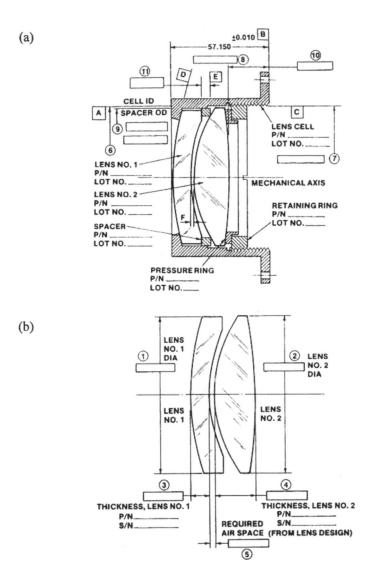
An air-spaced doublet assembly made by the lathe-assembly process. (a) Complete assembly, (b) measurements made on lenses. (From Yoder. 6)
